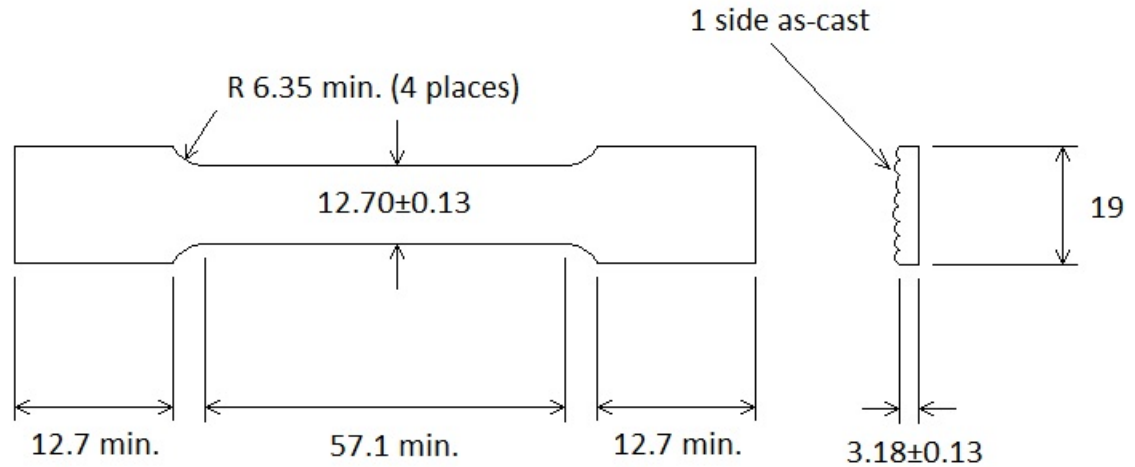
Tensile test specimen with as-cast surface. All dimensions in mm.
